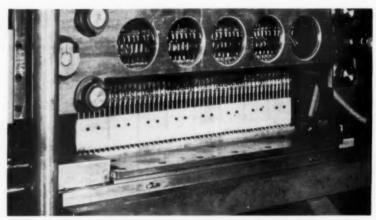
Resistance welding machine in which Stresskin honeycomb structures are fabricated into a finished product in one operation.
